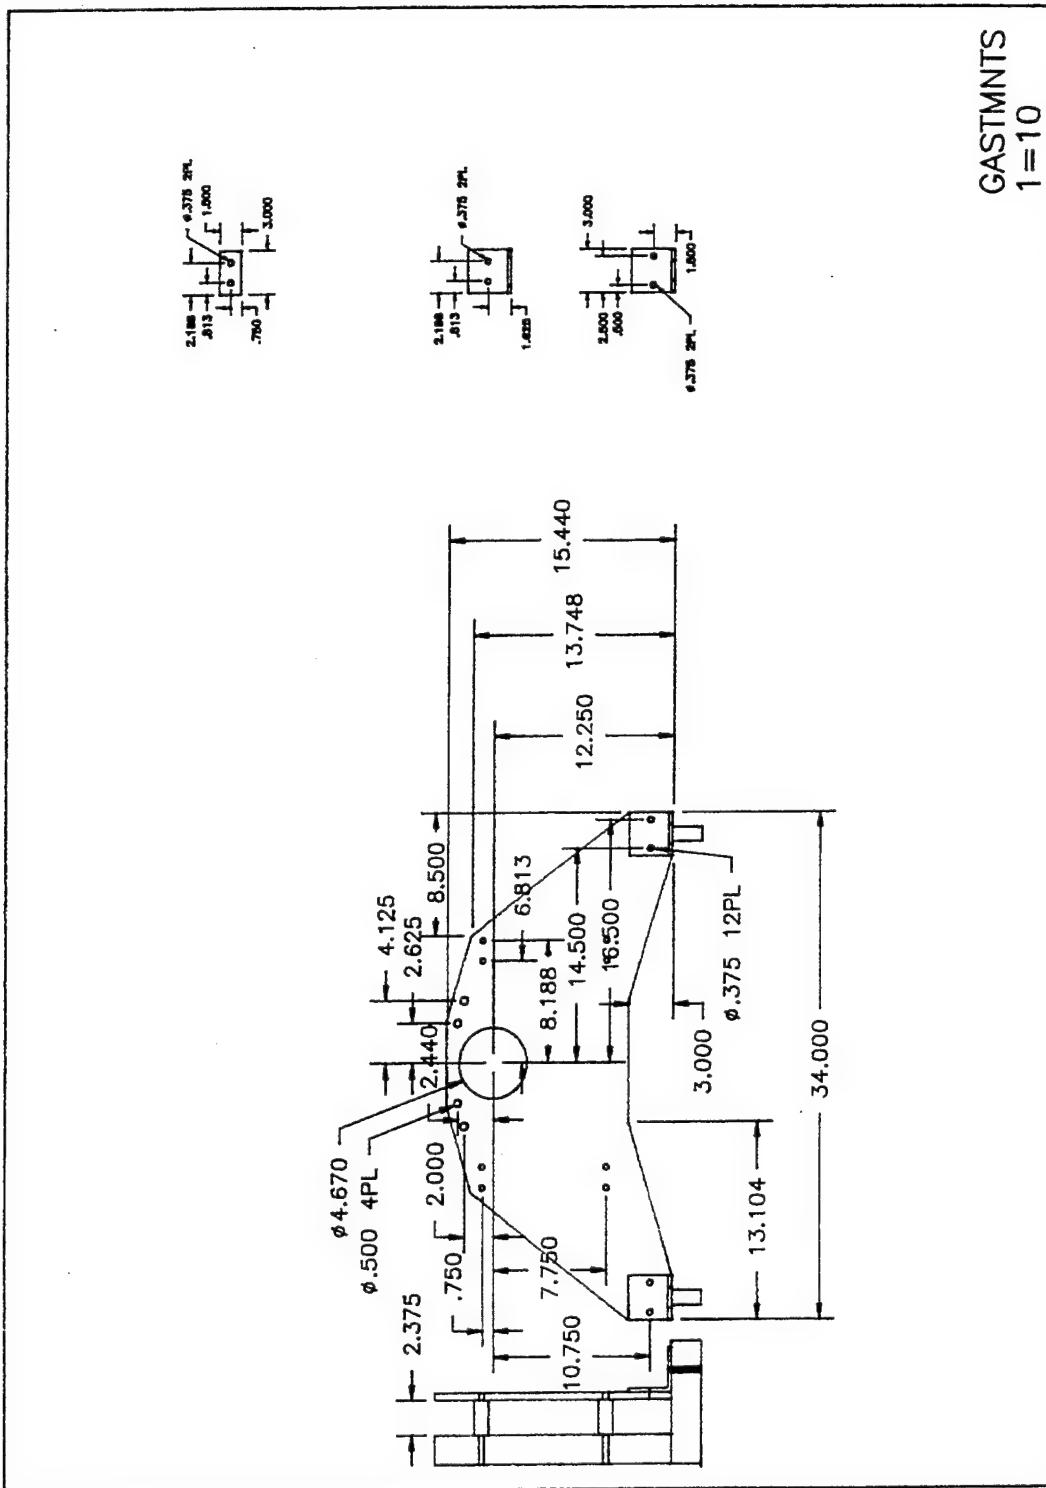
Detailed Drawing of Dynamometer Torque Plate.
